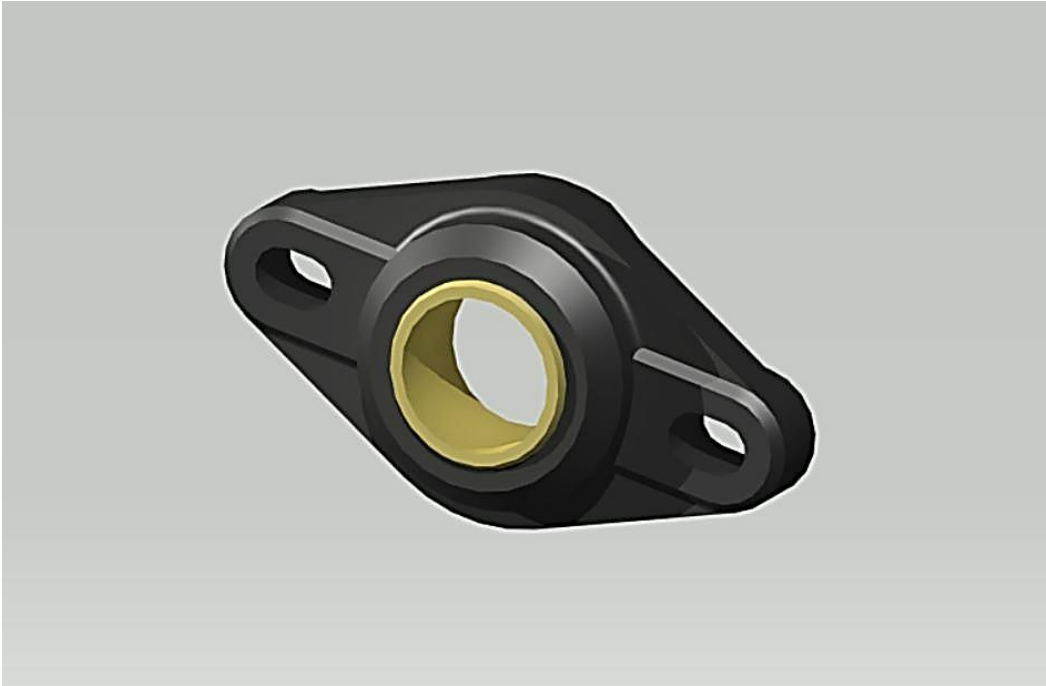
Driving pulley support flange (final CAD drawing, CATIA V5)
